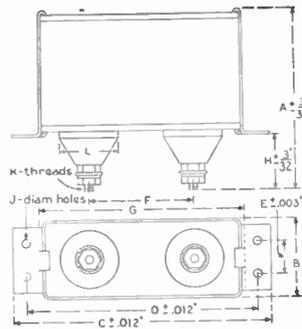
Inverted-mounting assembly. See table on opposite page for specifications
